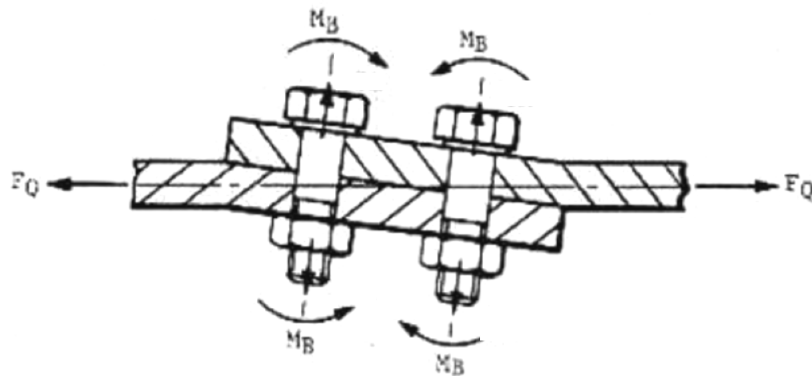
Fastener Bending and Tension in an Unsymmetrical Shear Joint
